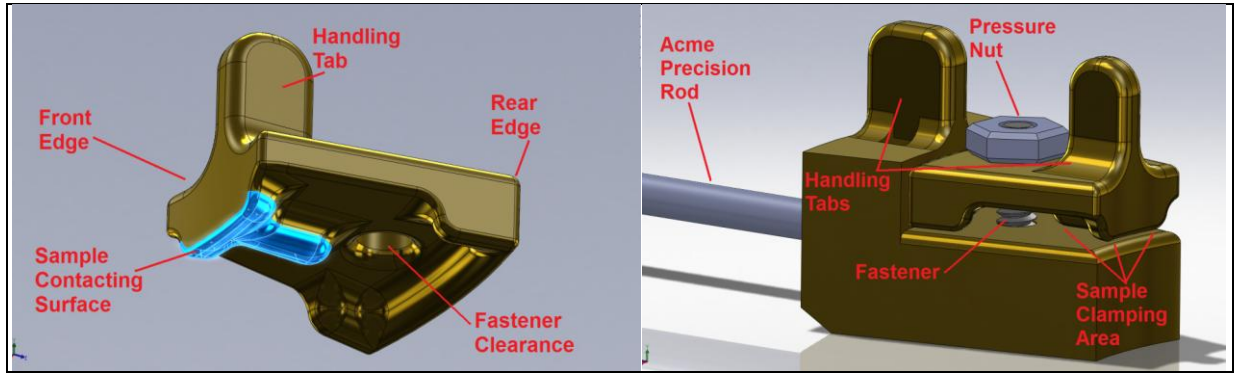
Upper clamp geometry (highlighted, left) and clamp head assembly showing clamping and handling features (right).
